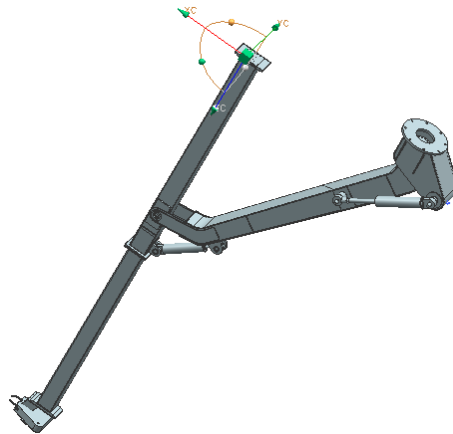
3D Model of Pipe Racking System for the Drilling Platform
